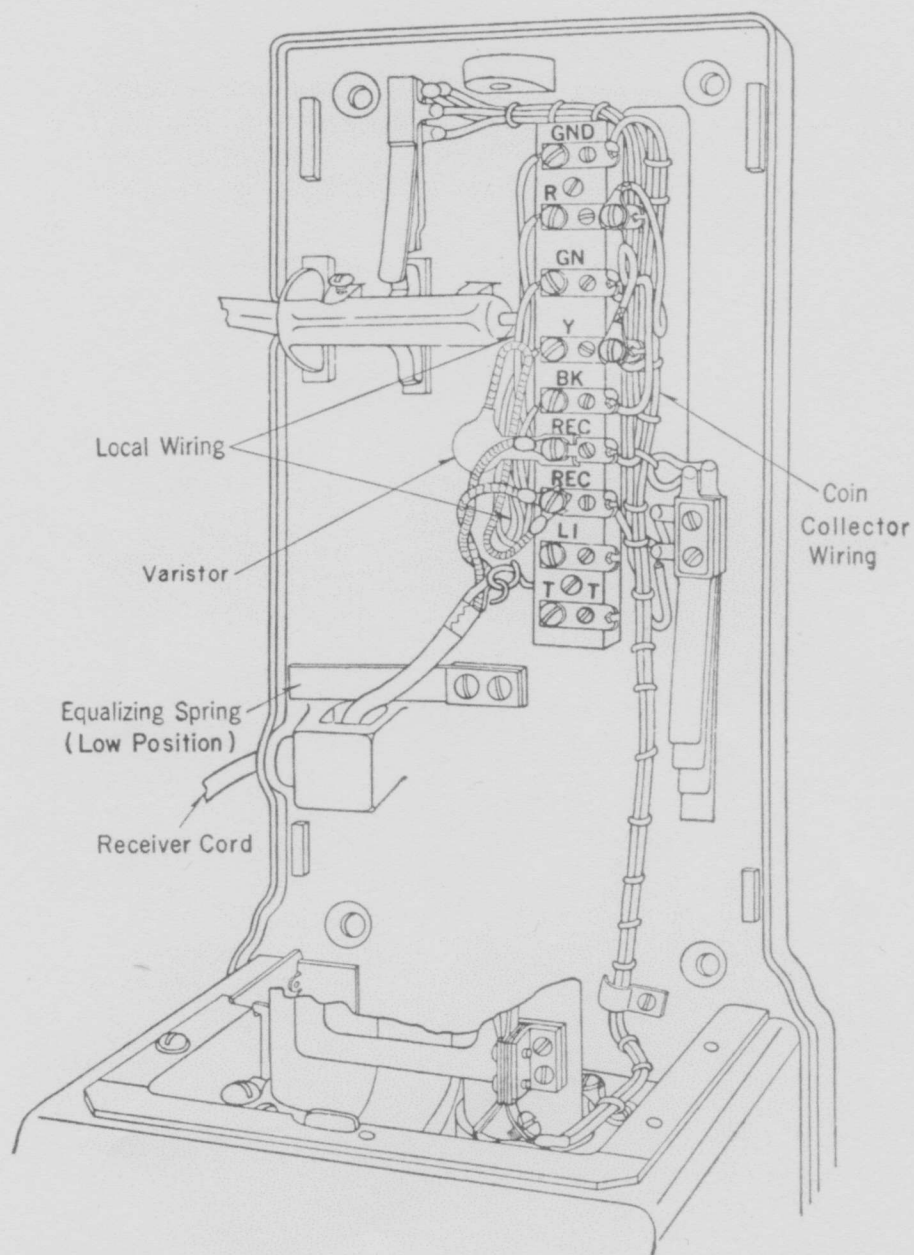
150-type, D-96589, or D-96719 Prepayment Coin Collector—Lower Housing and Backplate Assembly
